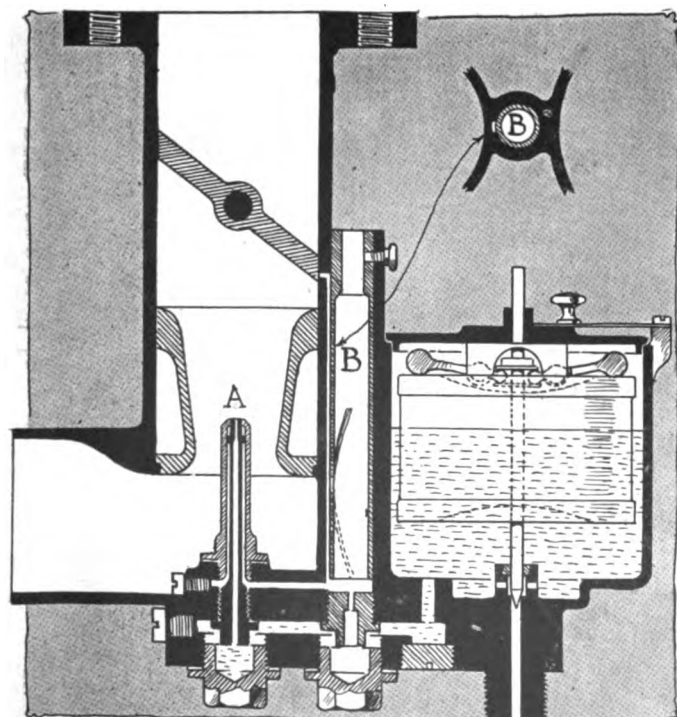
Cross-section of Zenith carbureter, showing concentric jet
